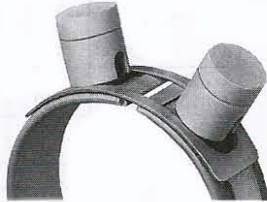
Quick Release Assembly with Spring Loaded Screw—Assembly Welded to Sheath with 1/4-28 screw
